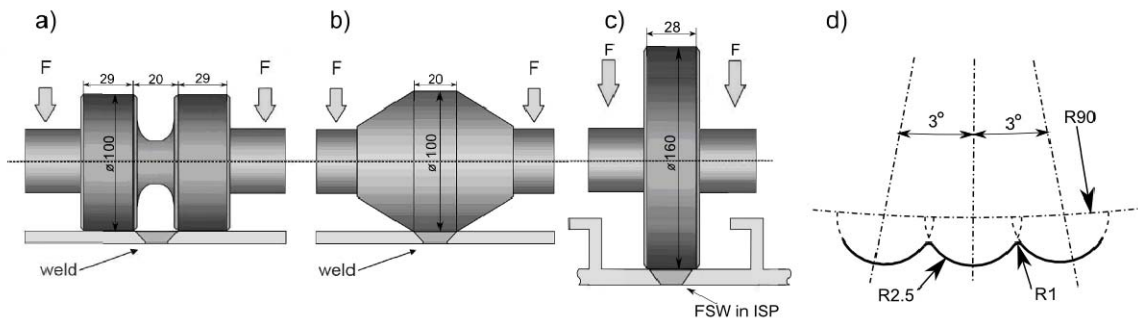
Schematic showing (a) the double and (b) the single roller and geometric dimensions for ISRT and PWRT respectively. In (c) the flat roller design for PWRT of the ISP material and in (d) the geometry of the corrugated roller are depicted. Note the greater diameter of the rollers for the ISP plates.
